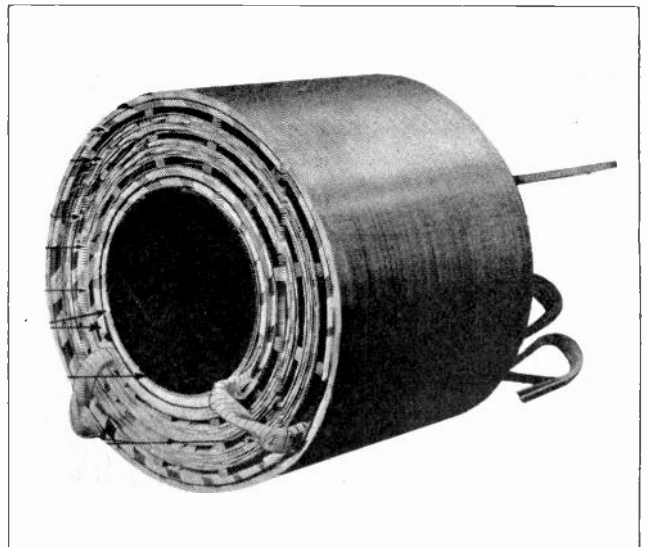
This view shows a transformer winding which is built up in layers that are spaced apart with wood strips to allow circulation of cooling oil through the winding. (Photo Courtesy General Electric Co.)
